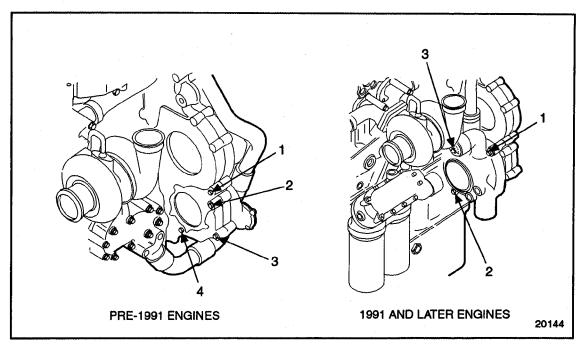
Gear Case Cover Bolt Torque Sequence (Right Rear)
